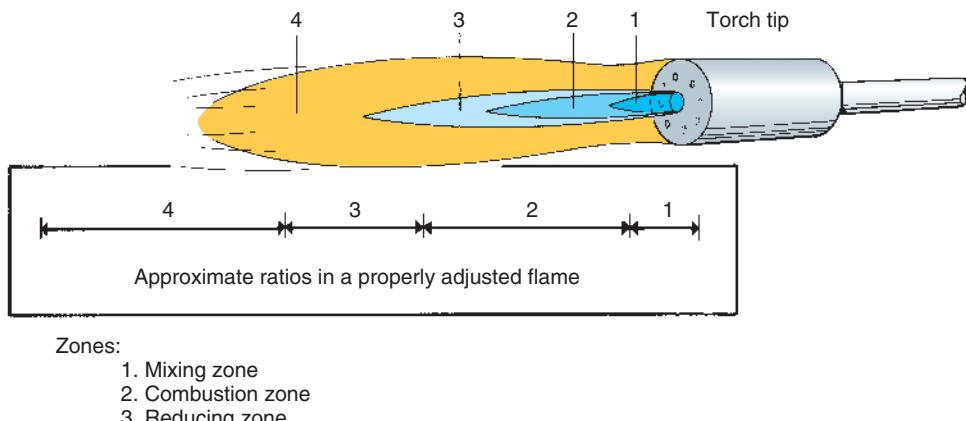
Illustration of gas-air torch adjusted for soldering.
